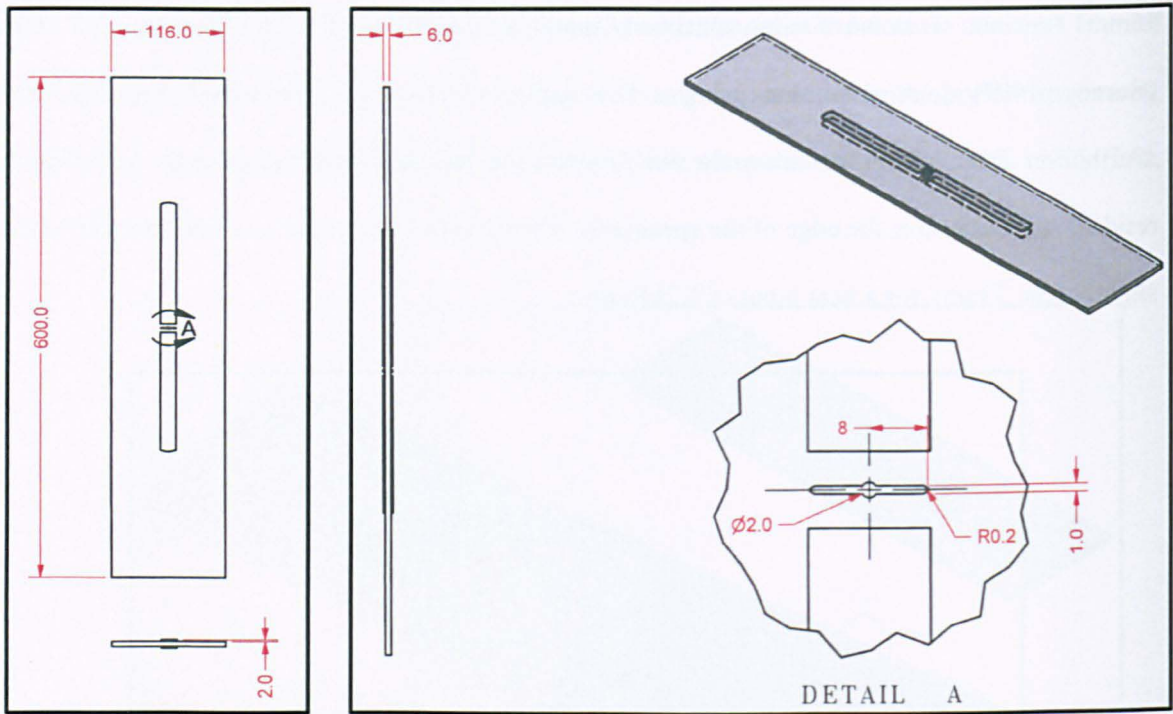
Detailed drawing of a centre crack tension specimen manufactured from 6mm thick 6082 T651 aluminium alloy (weld beads also shown).
